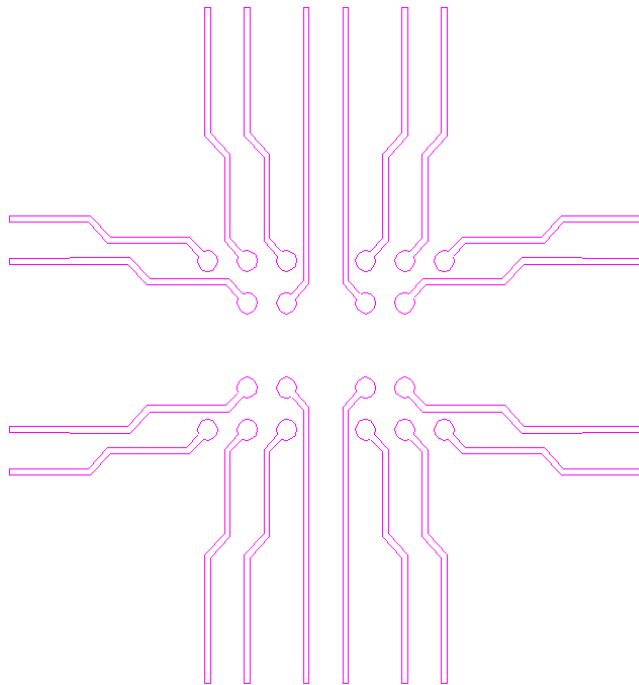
• Suggested Board Layout for NSMD of Soldered Pads for CS196 CSPs (PCB Top Layer)
